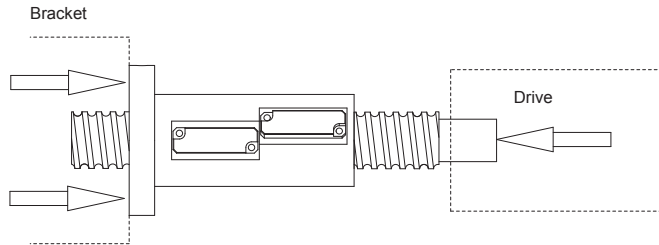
Recommend mounting direction of heavy load ballscrew
